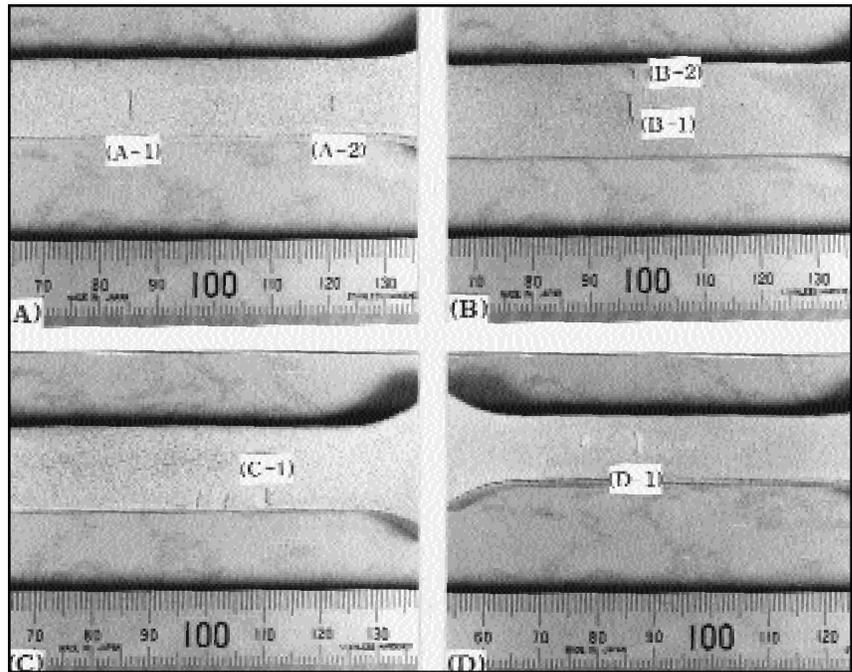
The morphology of surface cracks after magnetic particle inspection of FCAW deposits.
